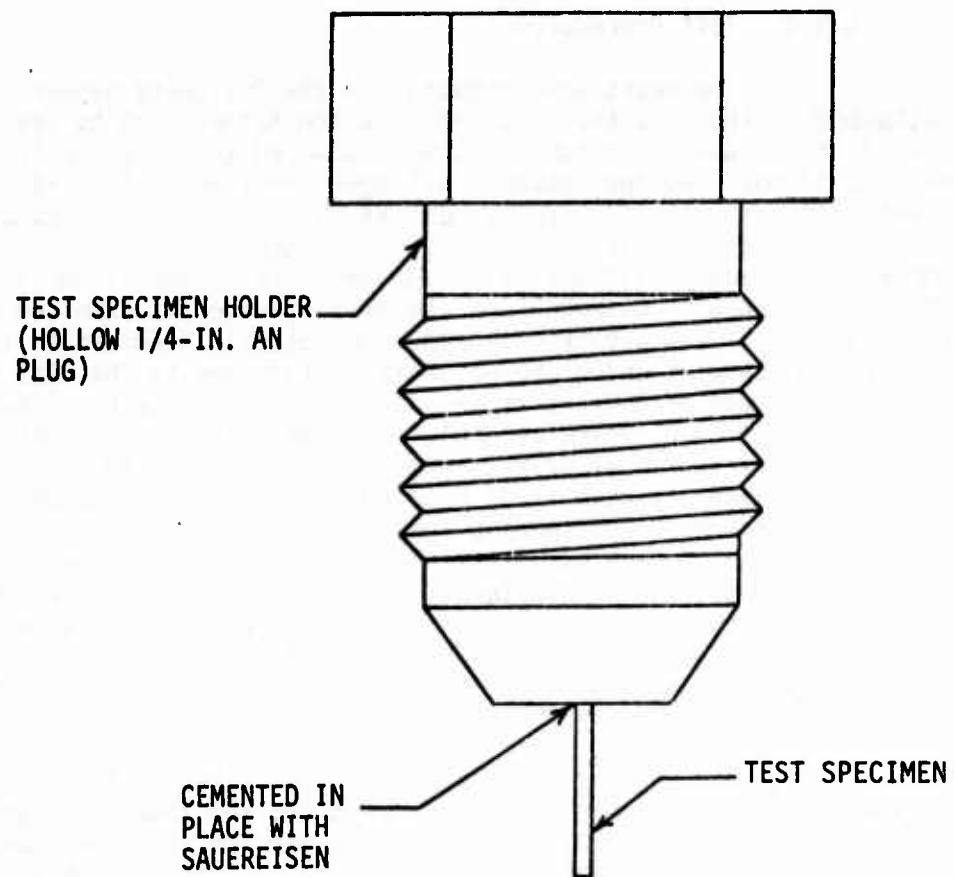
Schematic of Test Specimen Holder with Test Specimen in Place
